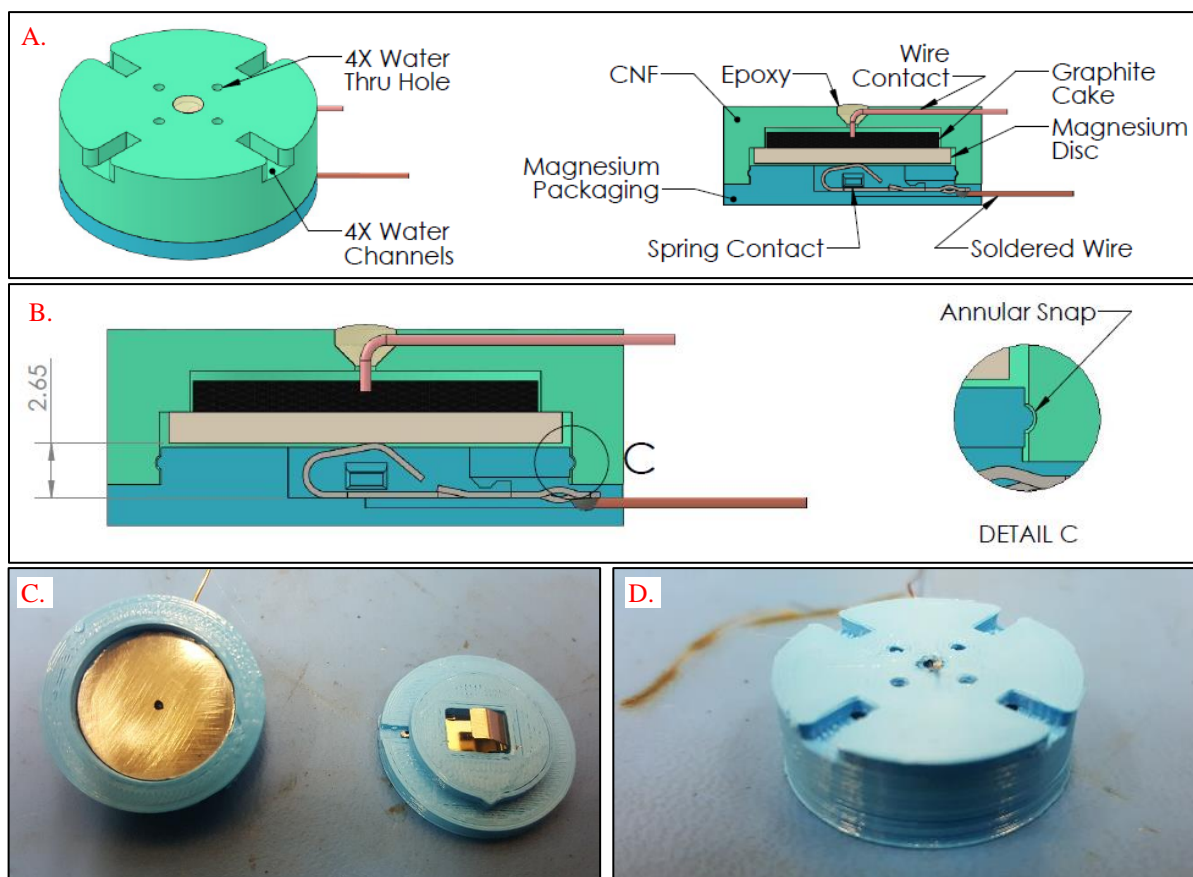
Spring contact for magnesium, dimensions in millimetres
